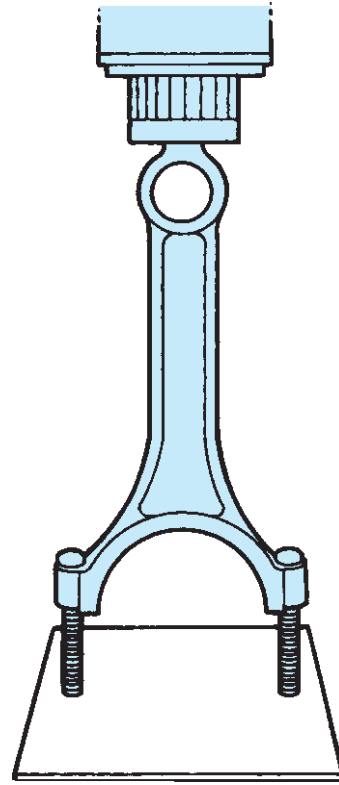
Rod bolts are quickly removed by using a press.
